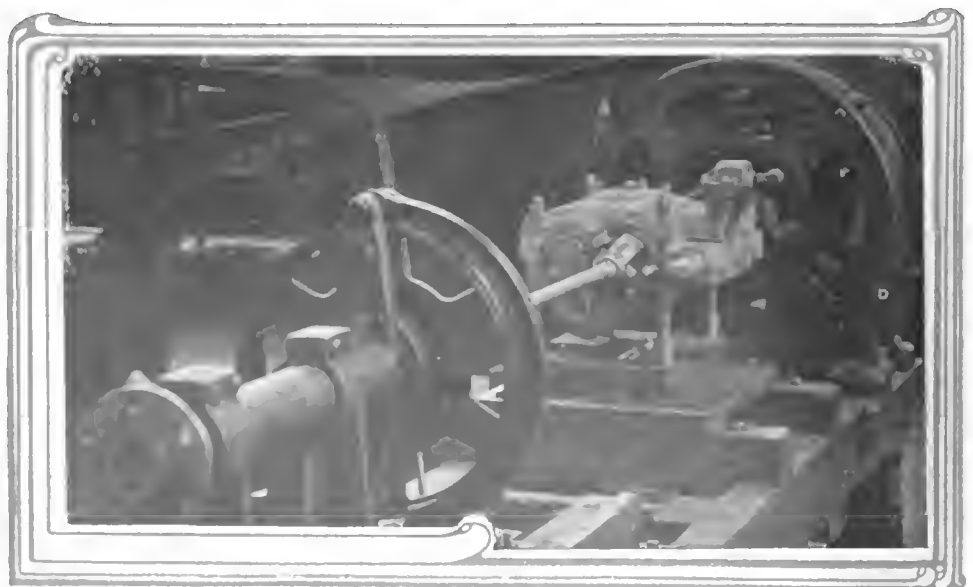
Pierce-Arrow testing machine, used to load transmission gears to try them out
